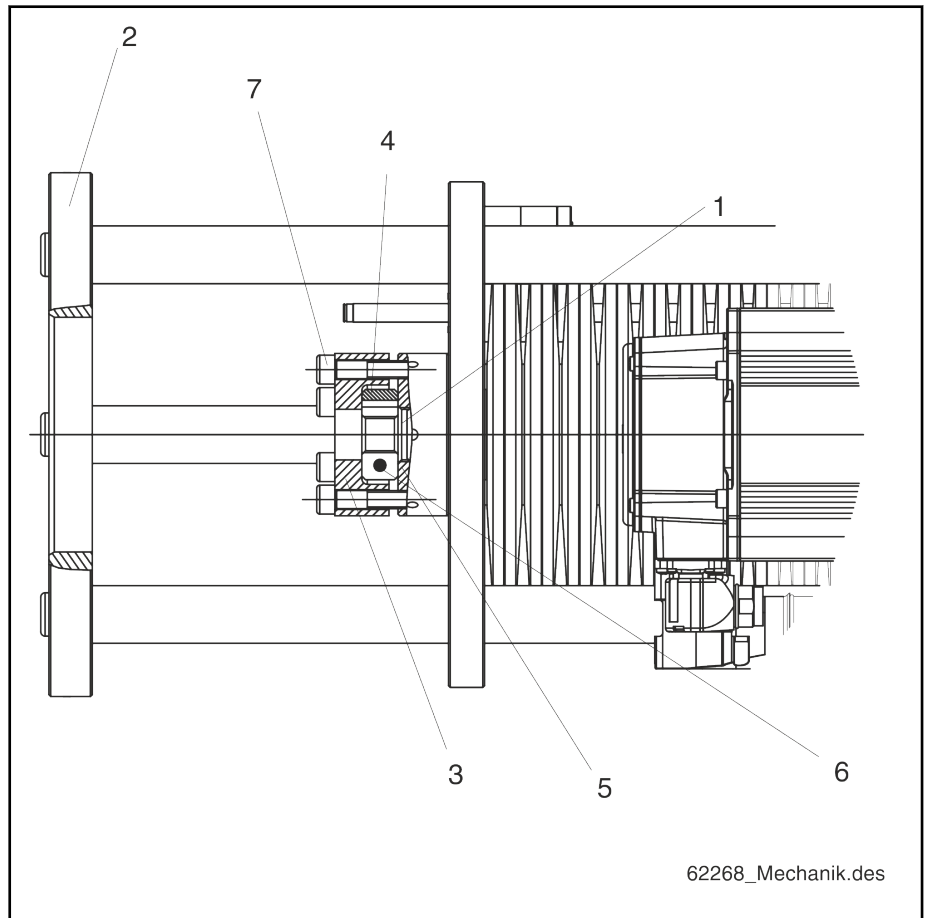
Mounting the spindle of the drive unit to the spindle of the customer valve.
